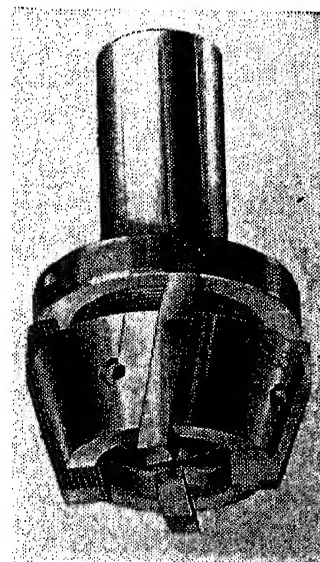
An adjustable blade hollow mill. (Courtesy Gairing Tool Co.)
